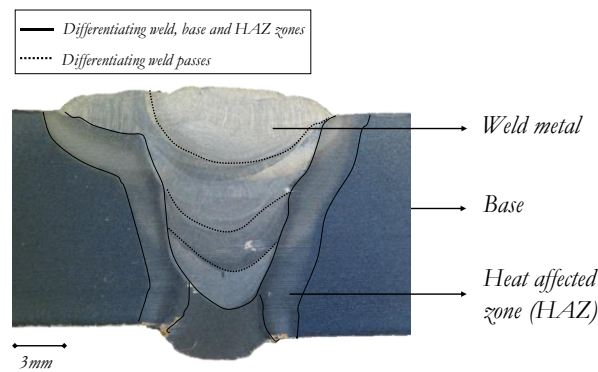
The three regions of the weld – Base, weld and HAZ along with different layers of weld passes
